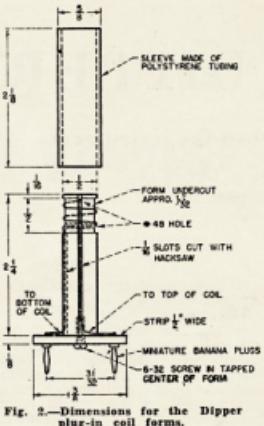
Dimensions for the Dipper plug-in coil forms.
